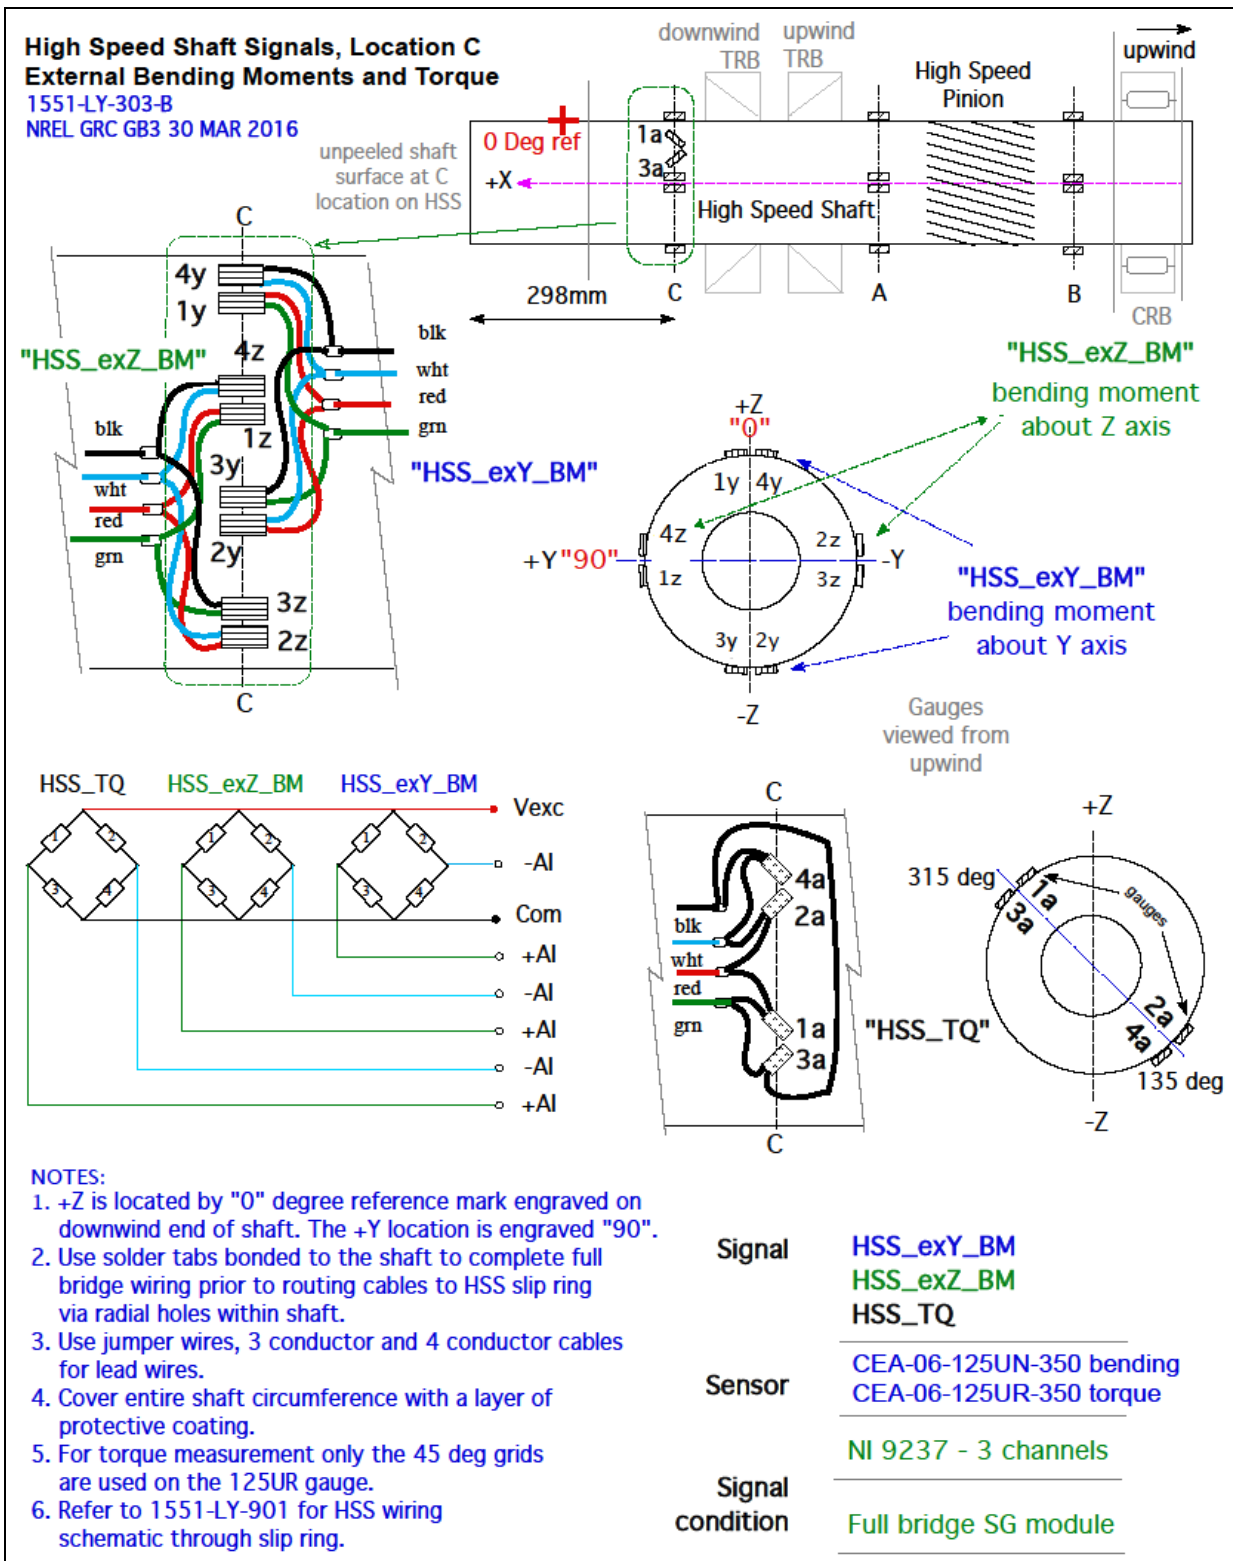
High-speed shaft bending and torque at location C. Illustration by Romax Technology
